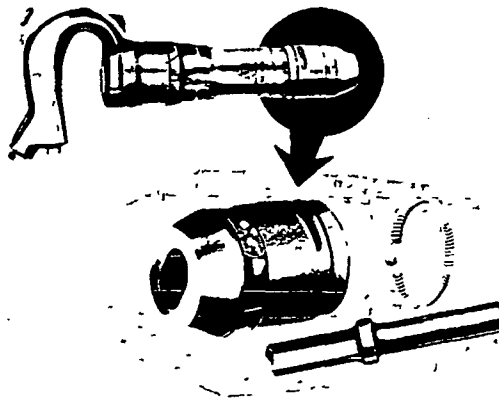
Chipping hammer safety retainer prevents the discharge of the tool.
